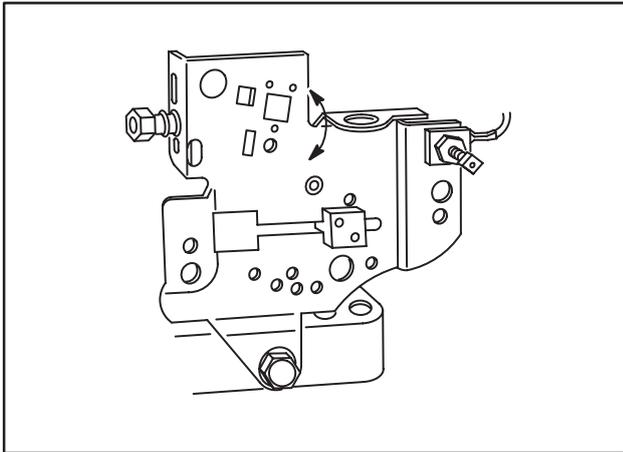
170400, 171400, 190400, 194400, 195400, 221400, 222400, 252400, 254400 with Rack & Pinion Control after Date Code 83121500, except 253400, 255400
